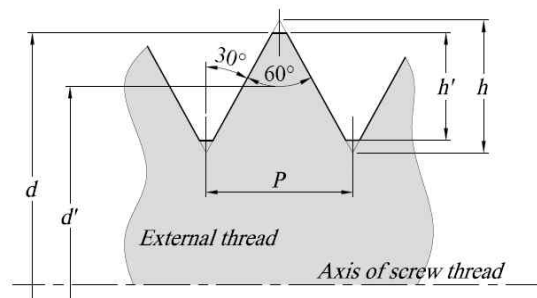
Standard design parameters of screw threads⁽¹⁵⁾
